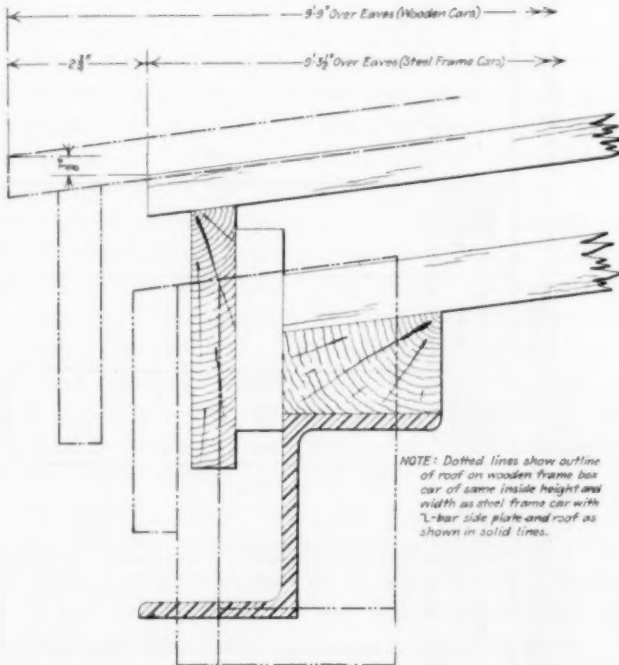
DETAIL OF ROOF CLEARANCES ON STEEL FRAME AND WOODEN BOX CARS
